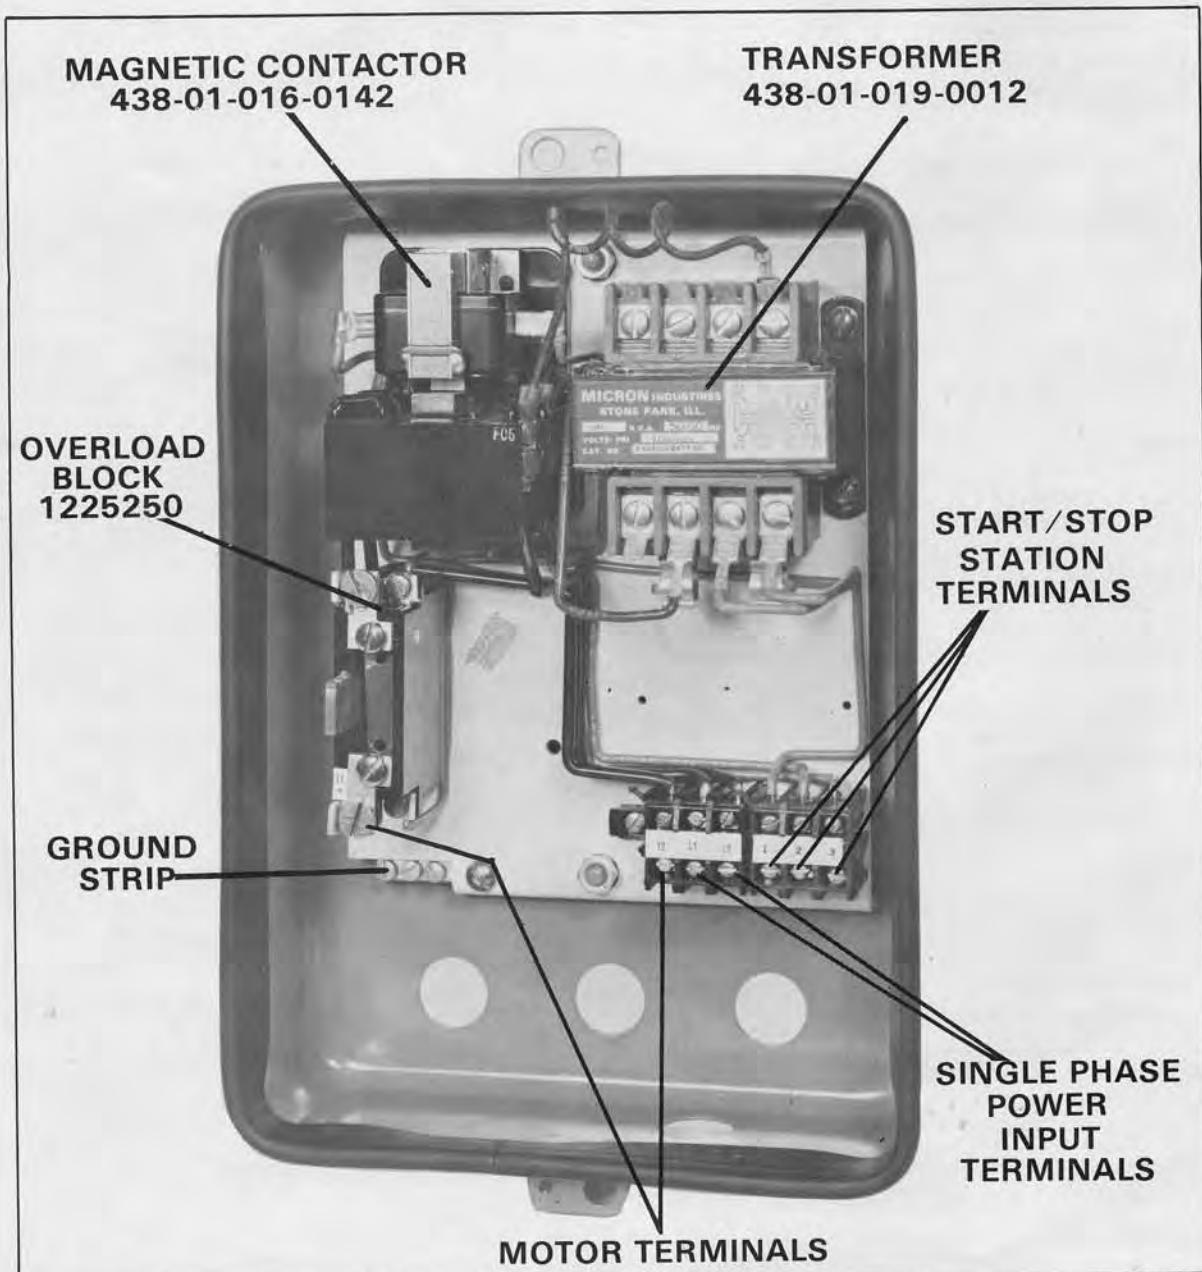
STANDARD SINGLE PHASE MOTOR STARTER
